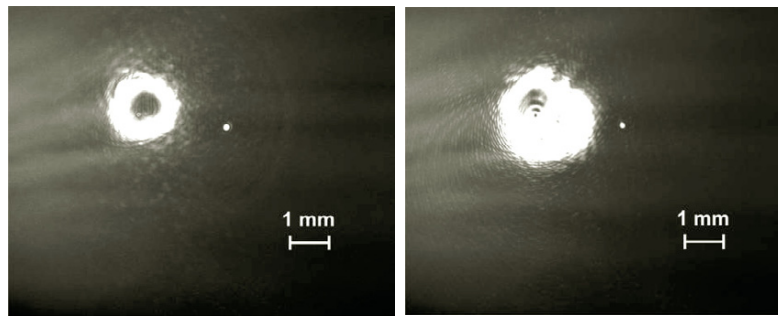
Profile of collimated beam before (left) and after (right) the welding process
